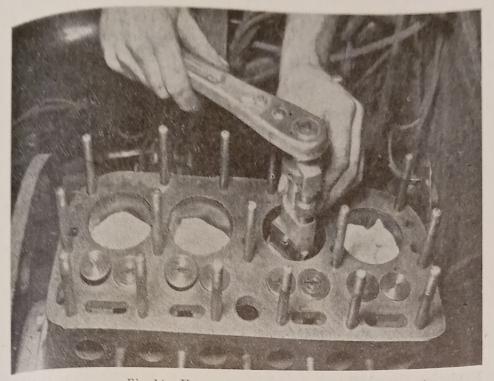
USING THE RIDGE-REMOVING TOOL
